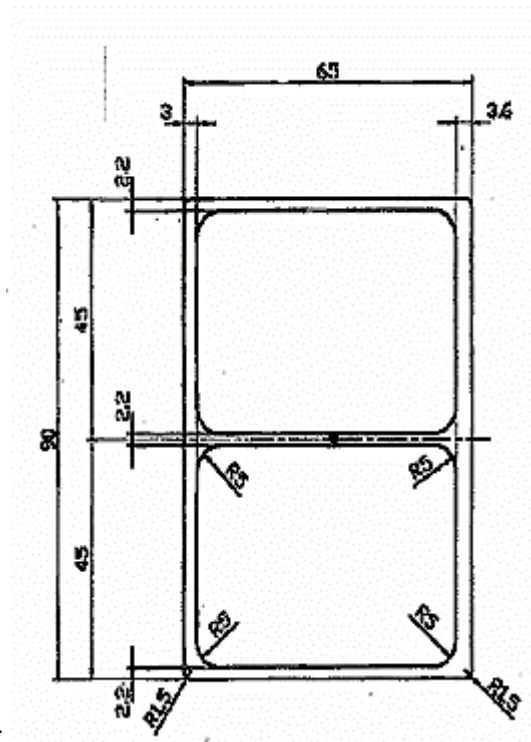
Cross-sectional shape of section collapse impact absorbing member
